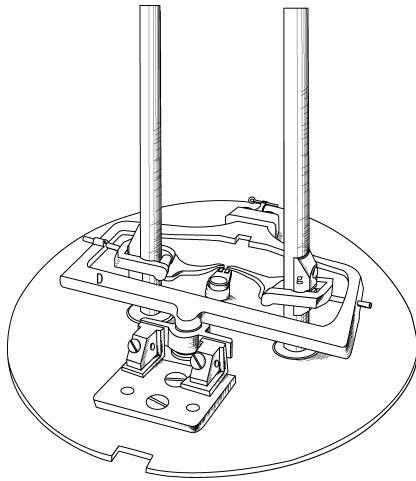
A Drawing of Friction-clutches Device from Fig. 9
